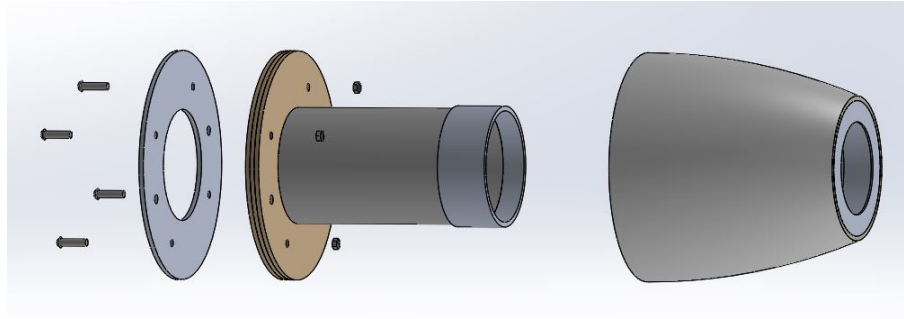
Exploded view of the thrust plate assembly. An aluminum plate is bolted to a plywood centering ring which allows for the motor tube to be epoxied into place and the tail cone to be attached to the motor retainer.
